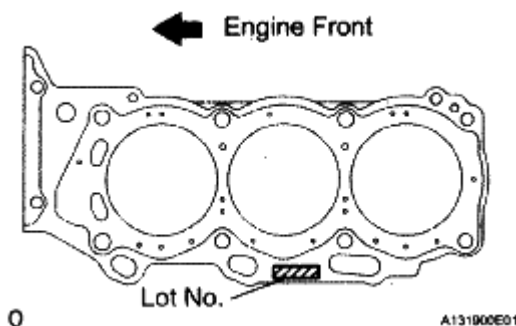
Placing Cylinder Head Gasket On Cylinder Block Surface With Lot No. Stamp Upward
